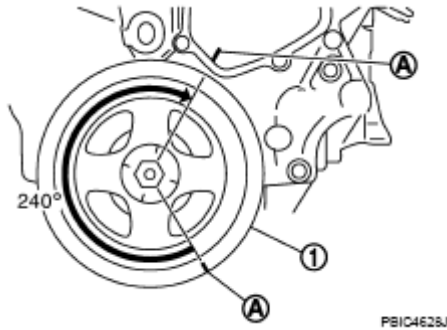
Identifying Matching Marks On Crankshaft Pulley
